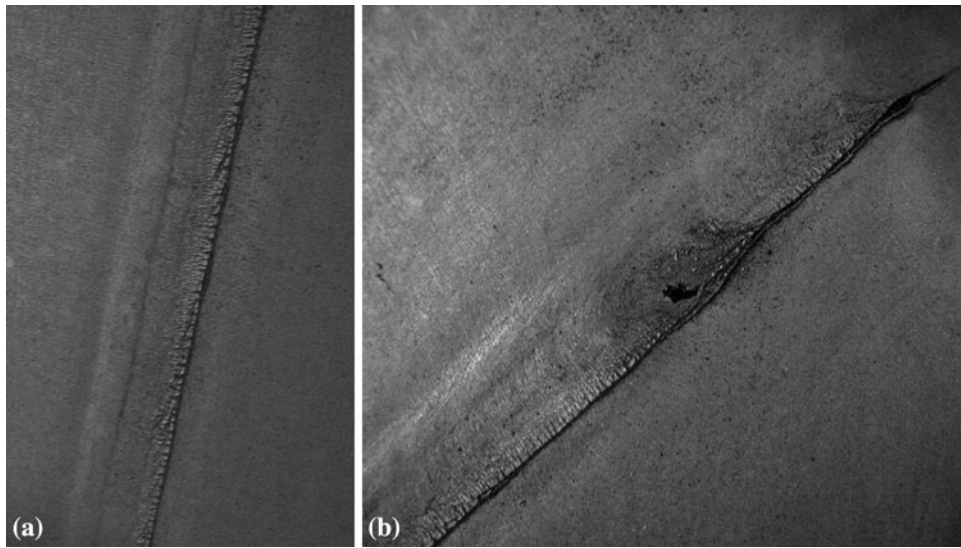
One of the first zeppelin pans that was SPF formed is shown with severe FSW surface defects: (a) tears on the FSW top surface and (b) a torn hole through the entire thickness of the FSW
